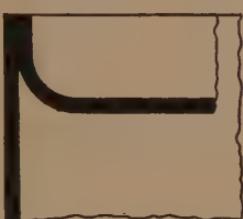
Head Weld for Storage and Medium-Pressure Tanks
